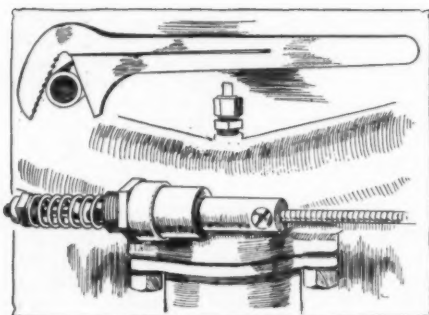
Top—Shaw wrench. Bottom—Handy carburetion controller
